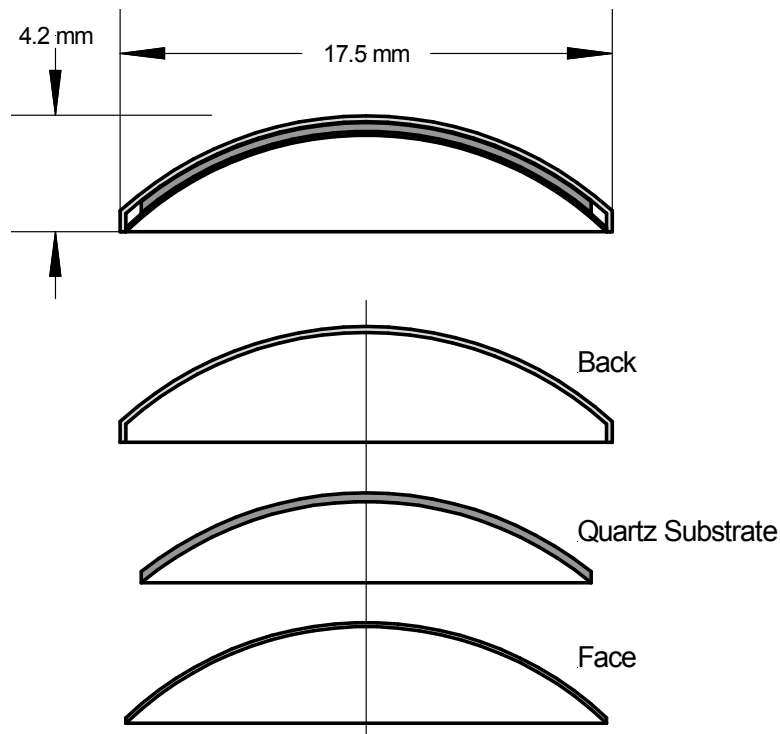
An exploded view of the second prototype plaque's encapsulation without the gold backing.
